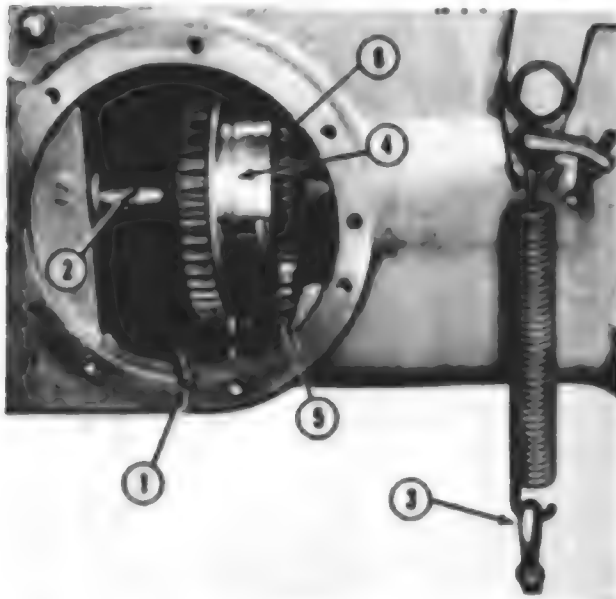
View of pto clutch, pump drive gear, lower pto drive shaft and lube pump gear on Models 684, 784 and 884.
